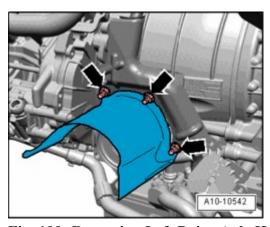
Removing Left Drive Axle Heat Shield From Transmission
